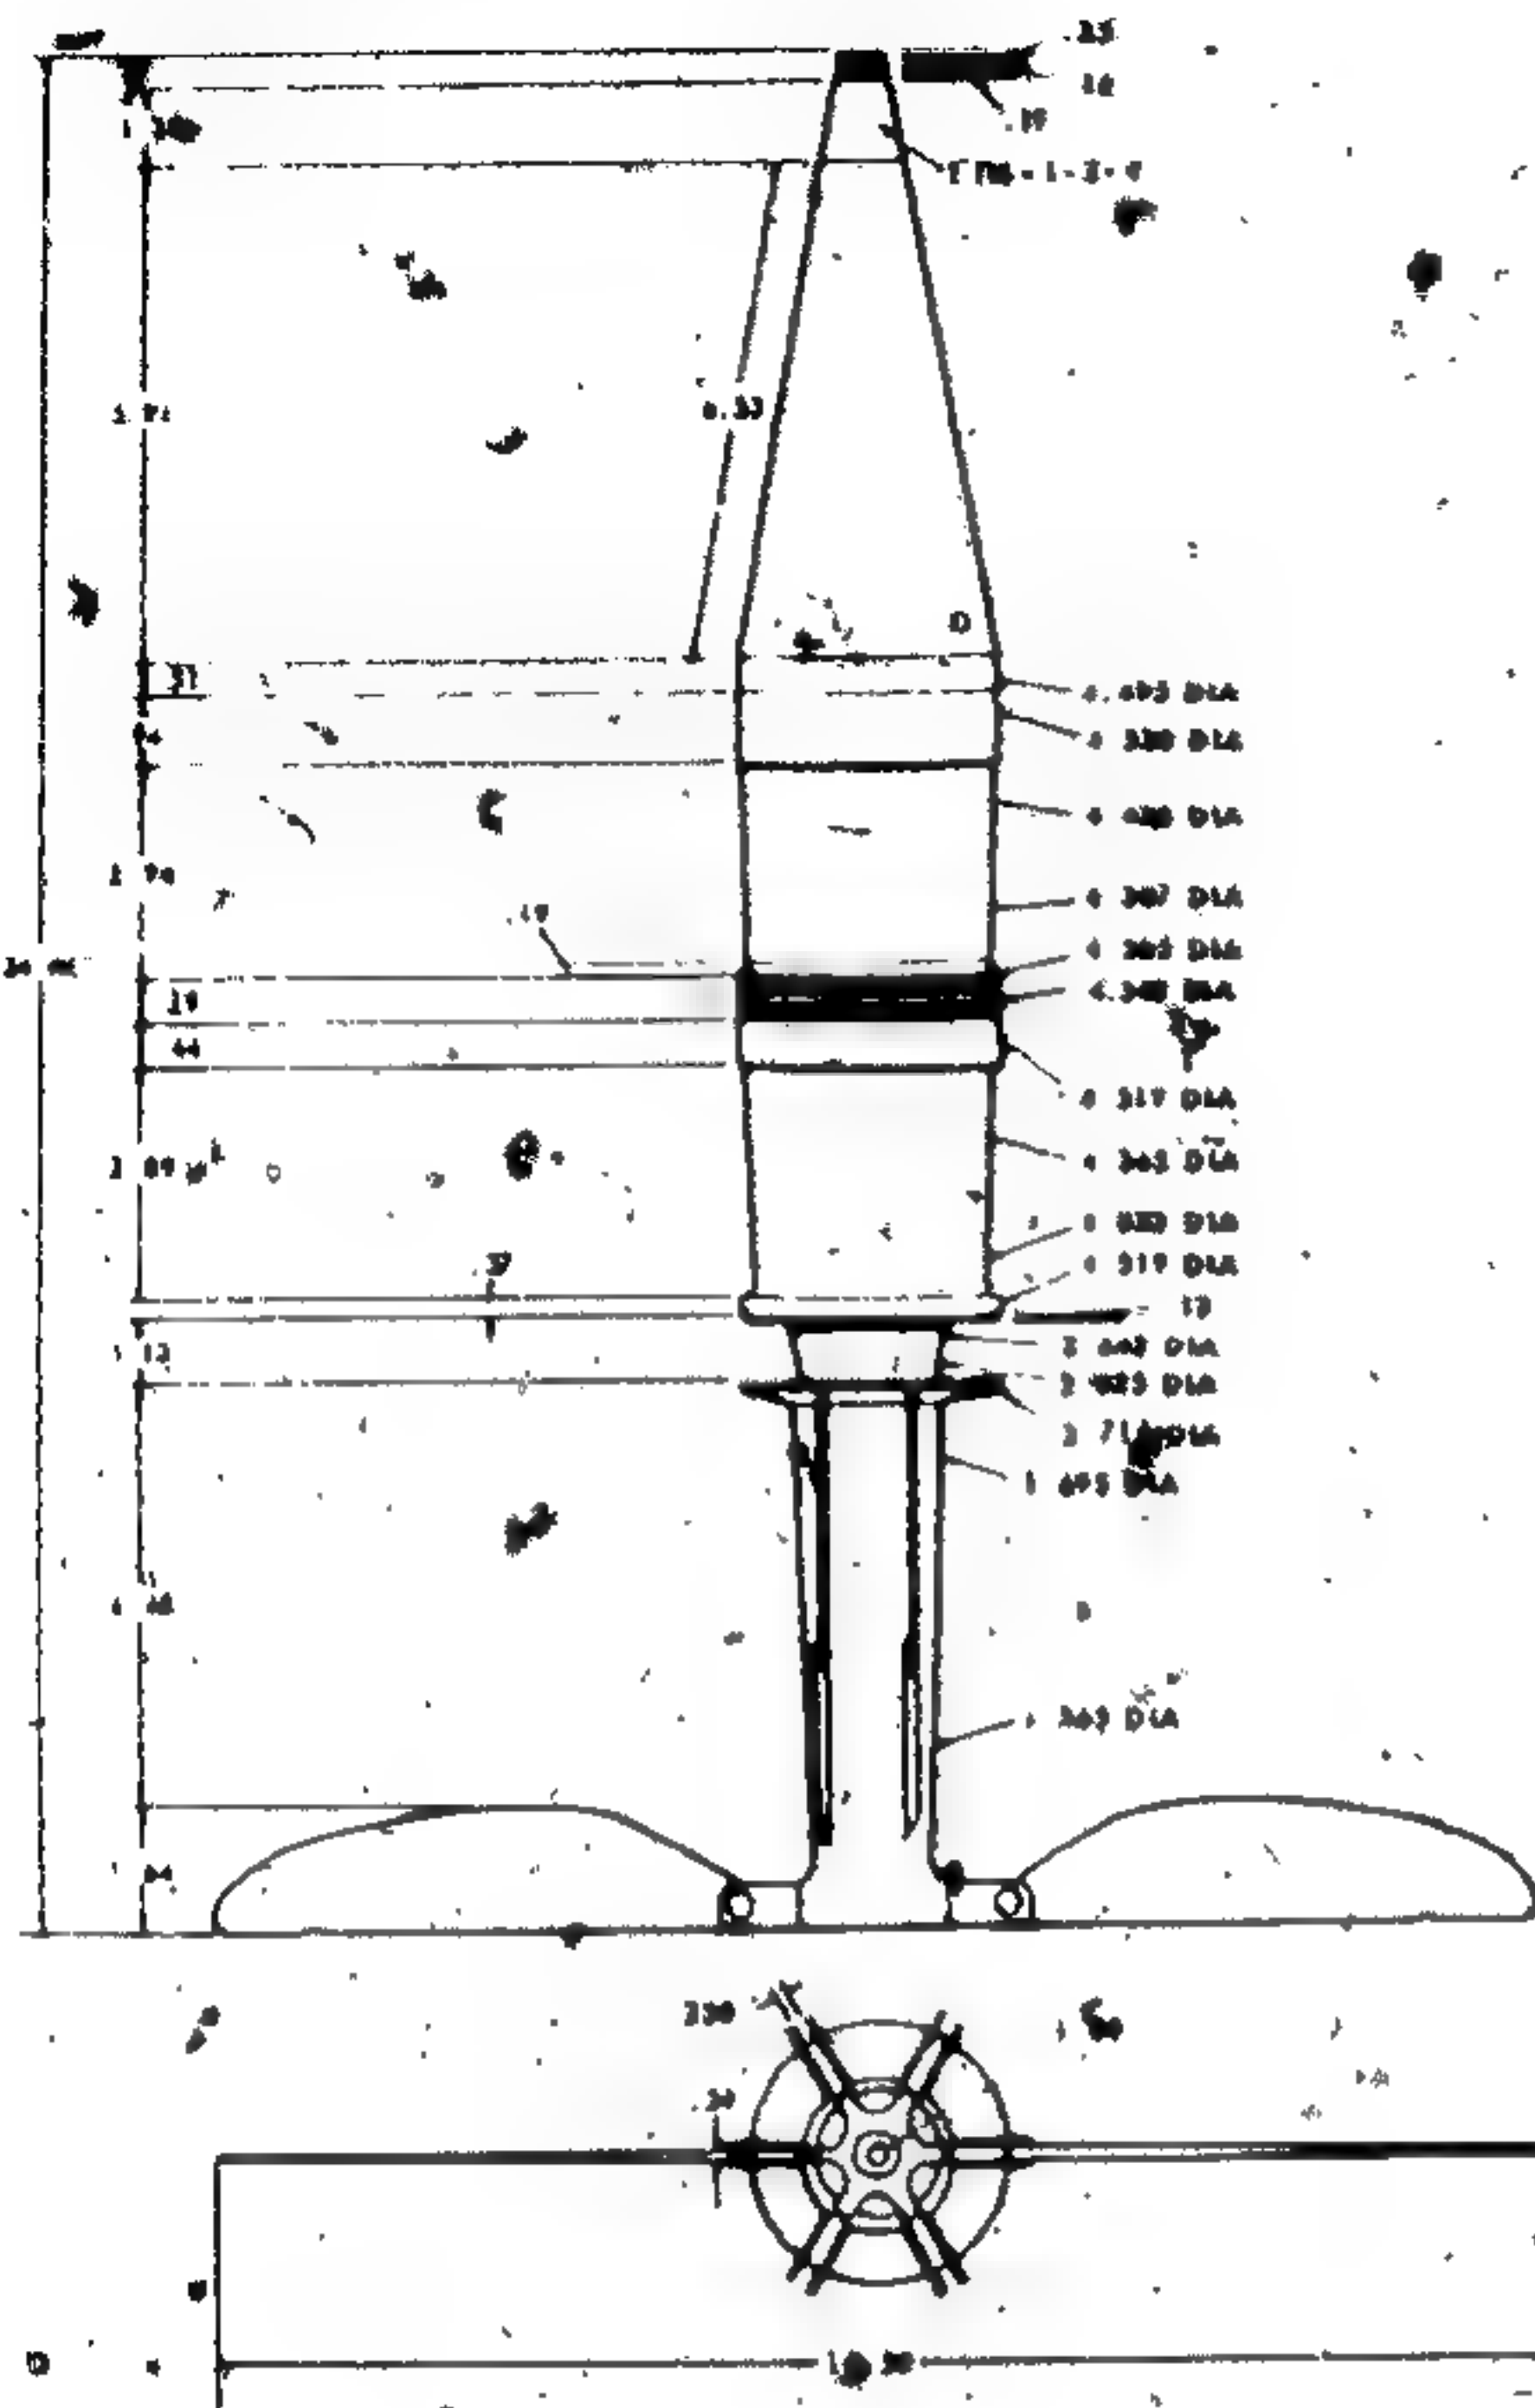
Soviet 115-mm HEAT projectile Model BK-4.
